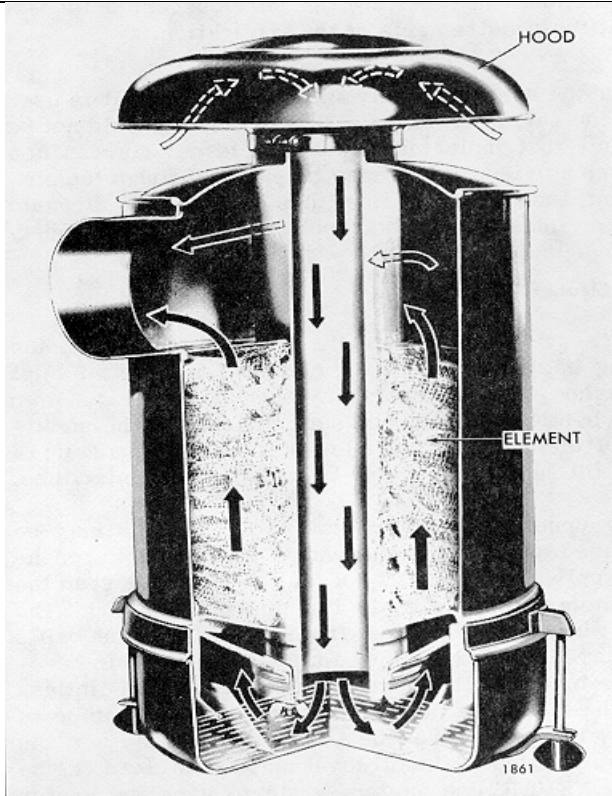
Oil Bath Air Cleaner and Silencer Assembly - Heavy Duty
